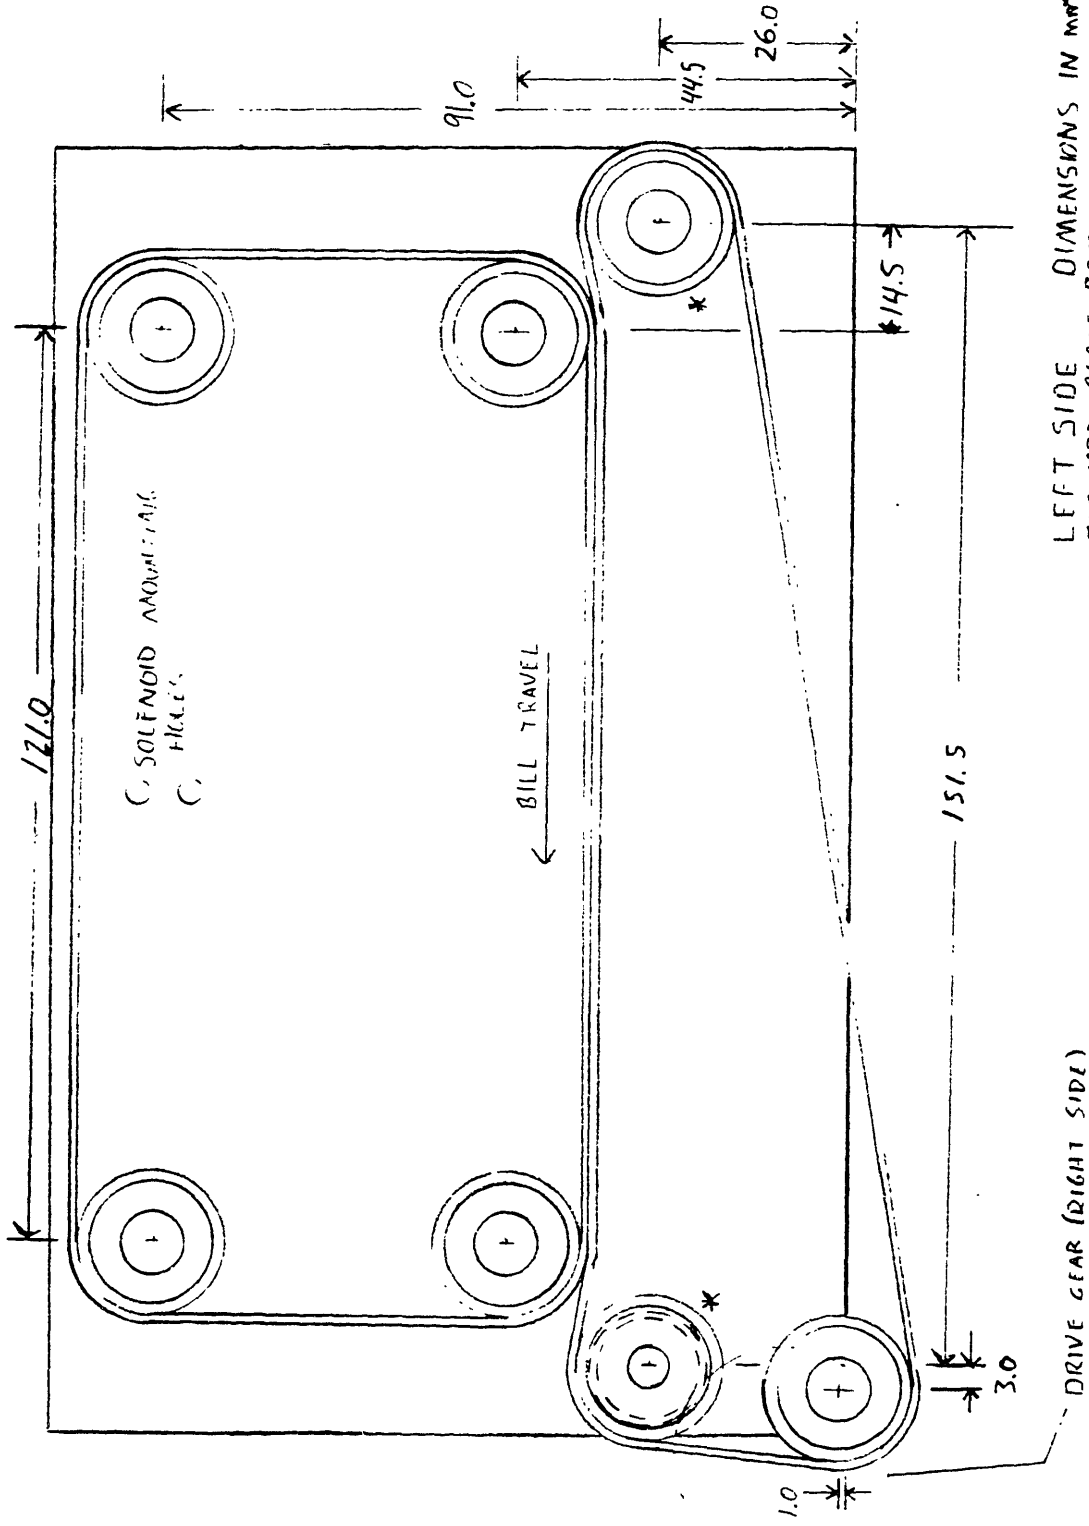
Top view drawing of the BRD test apparatus [Omron 90]
